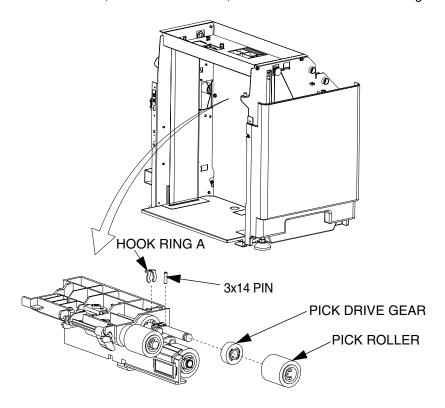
Removal of the Pick Drive Shaft Assembly
